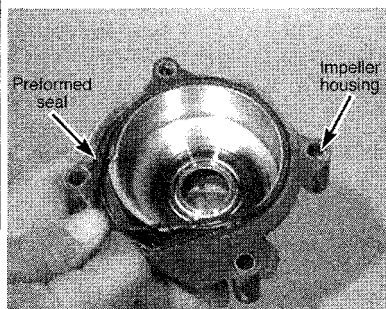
You should completely disassemble the pump housing removing the impeller, cup, seal and driveshaft O-ring from the underside...
